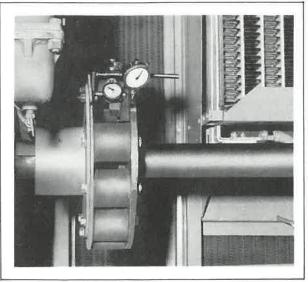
CHECKING ALIGNMENT BETWEEN COMPRESSOR AND FAN GEAR UNIT.
